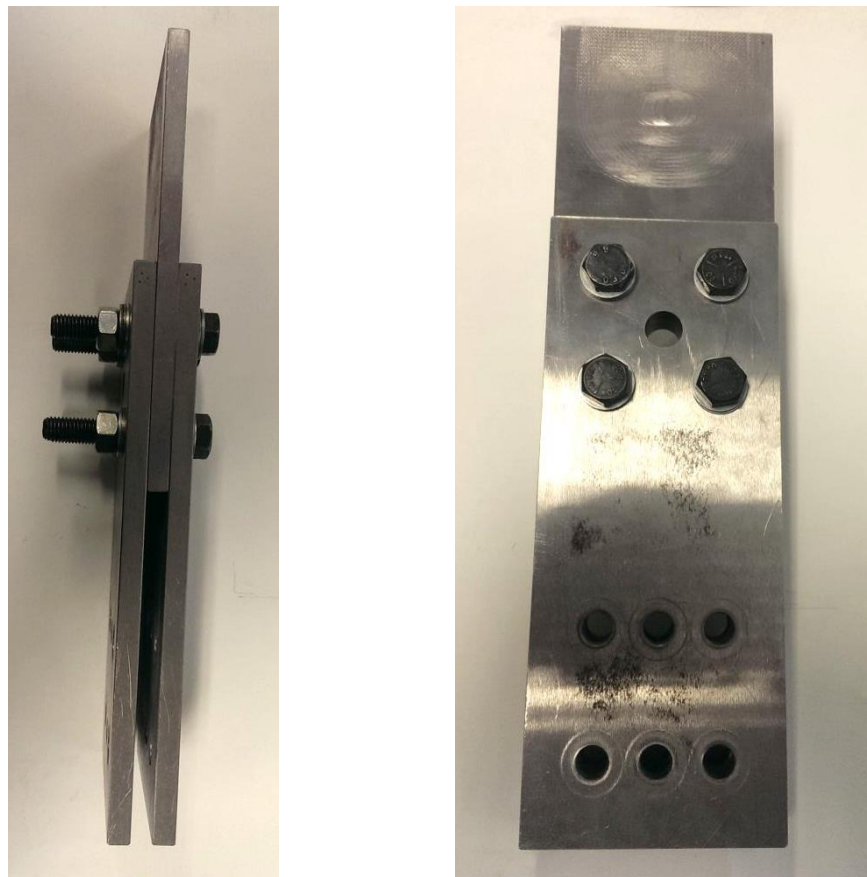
Steel Tension Loading Fixture for (A) to (D) Type Bolted Connections Tested with an M12 size Bolt
